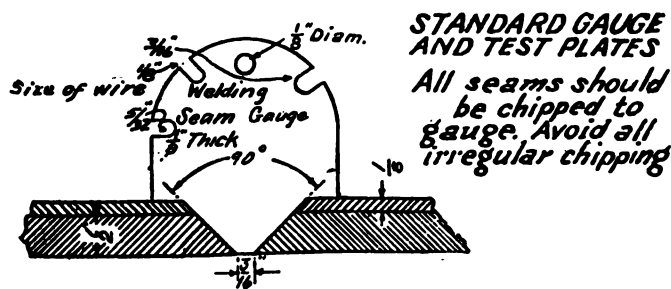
BEVEL FOR WELDING OF SHEET.
